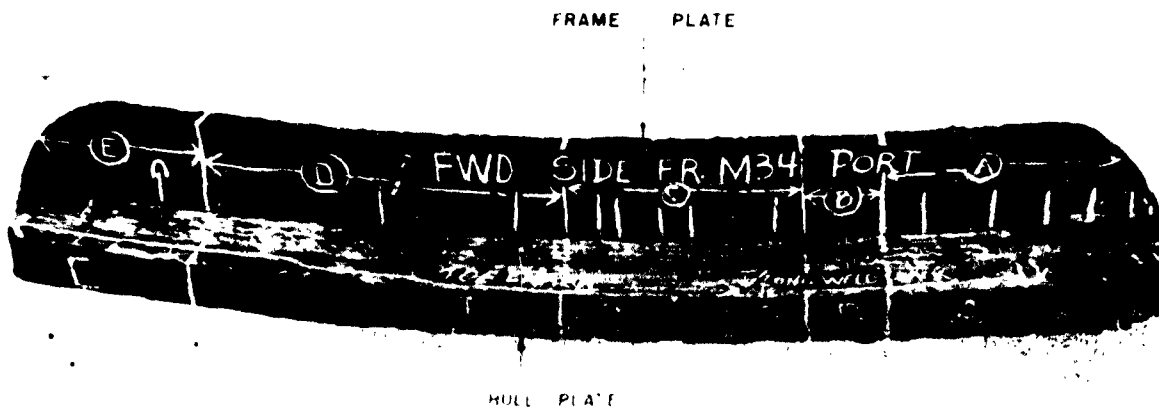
Frame-to-hull tee-joint removed from the pressure hull of a submarine.
